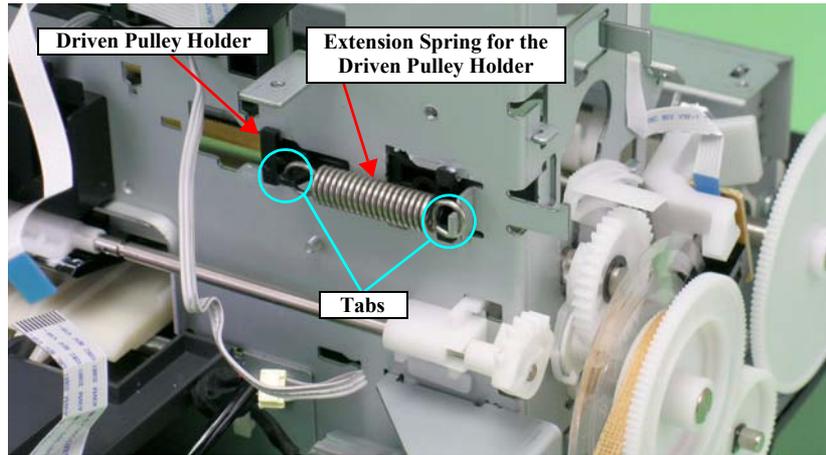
Removing the Extension Spring for the Driven Pulley Holder
